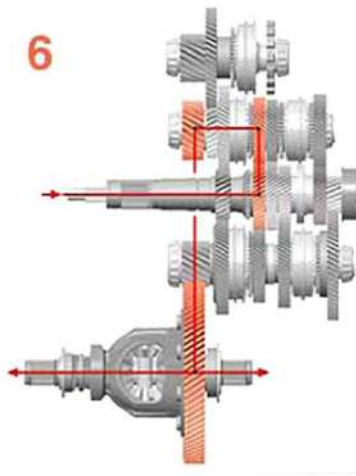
Gearbox operation in 4th, 5th and 6th gears transmissions (continued)
